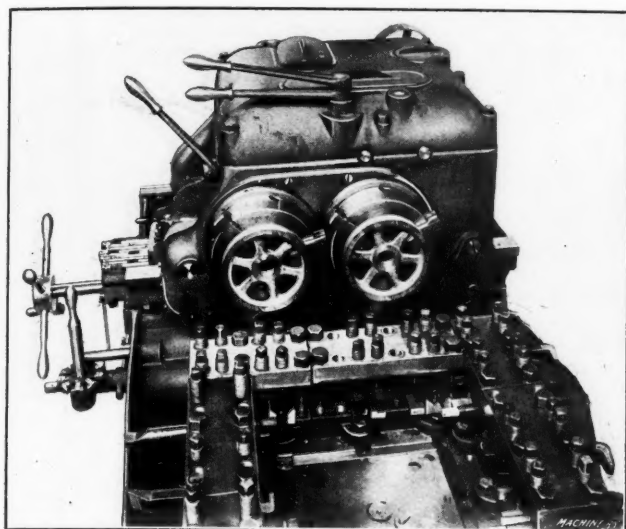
Turret and Head of Double-spindle Turret Lathe
